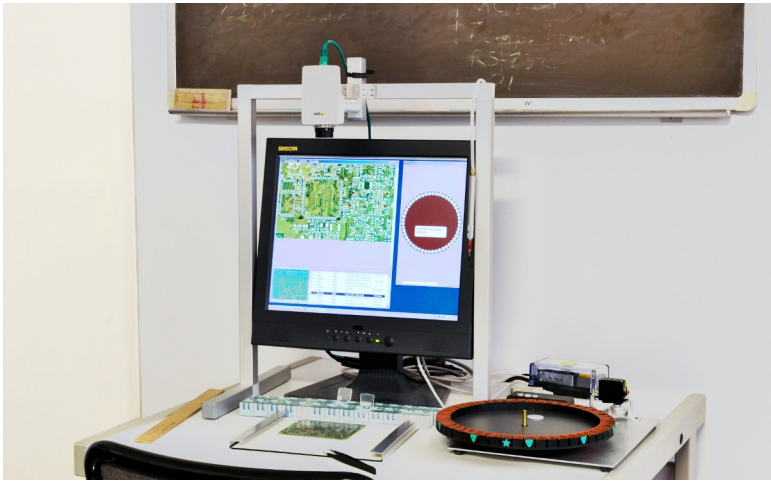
Camera-assisted manual PCB assembly, using VisualPlace
